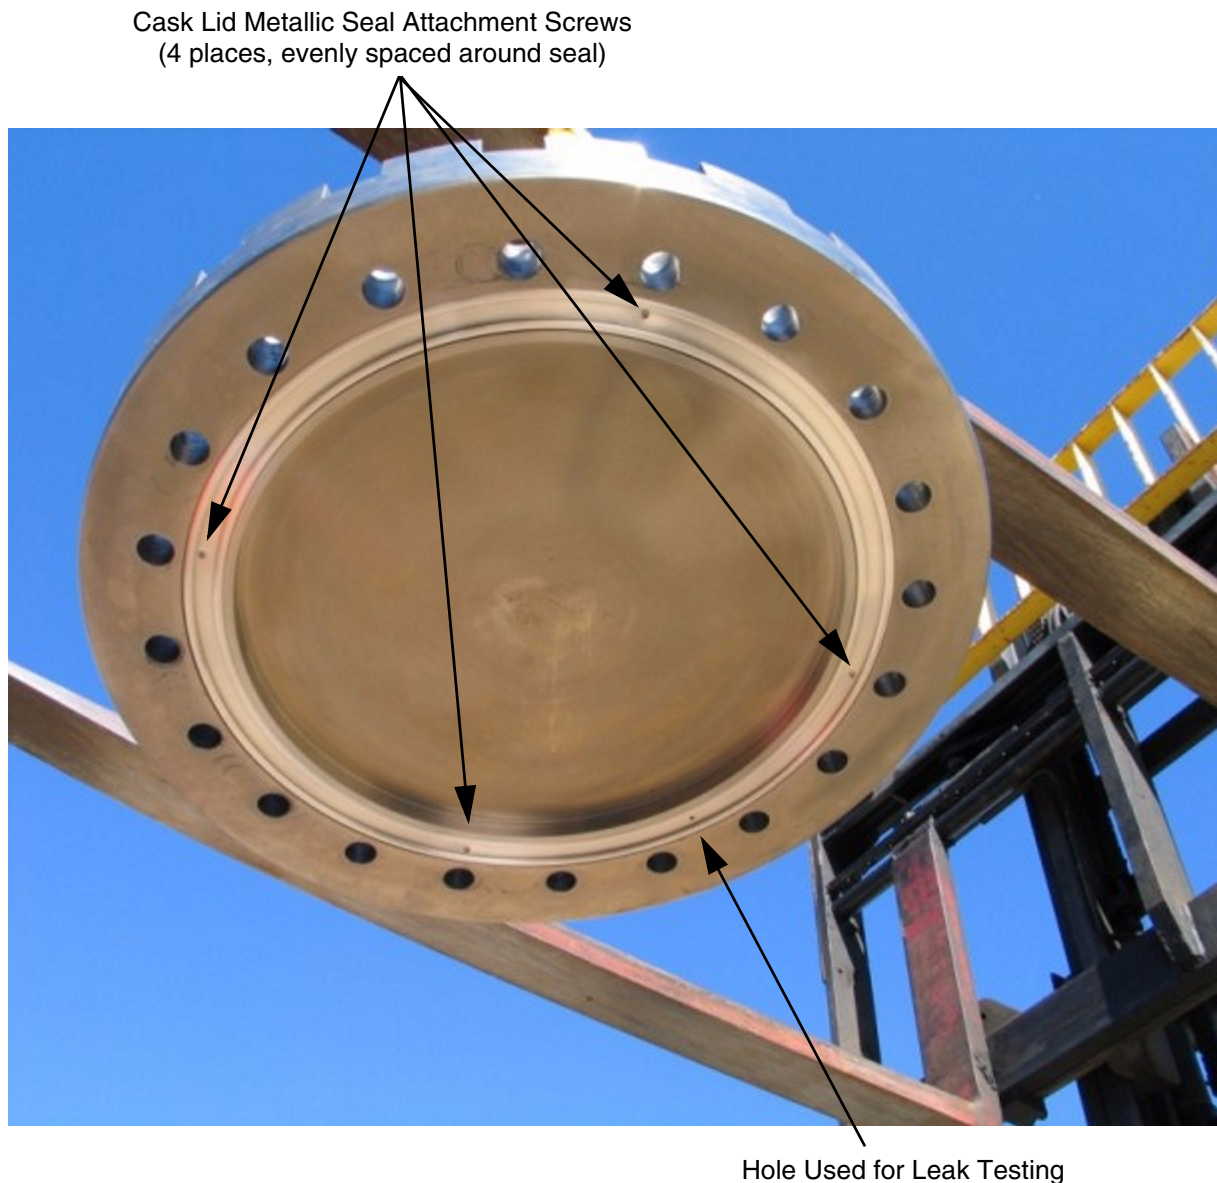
Cask Lid Showing the Cask Lid Metallic Seal Installed – Attachment by way of Four (4) Screws, and Leak-Testing Hole
